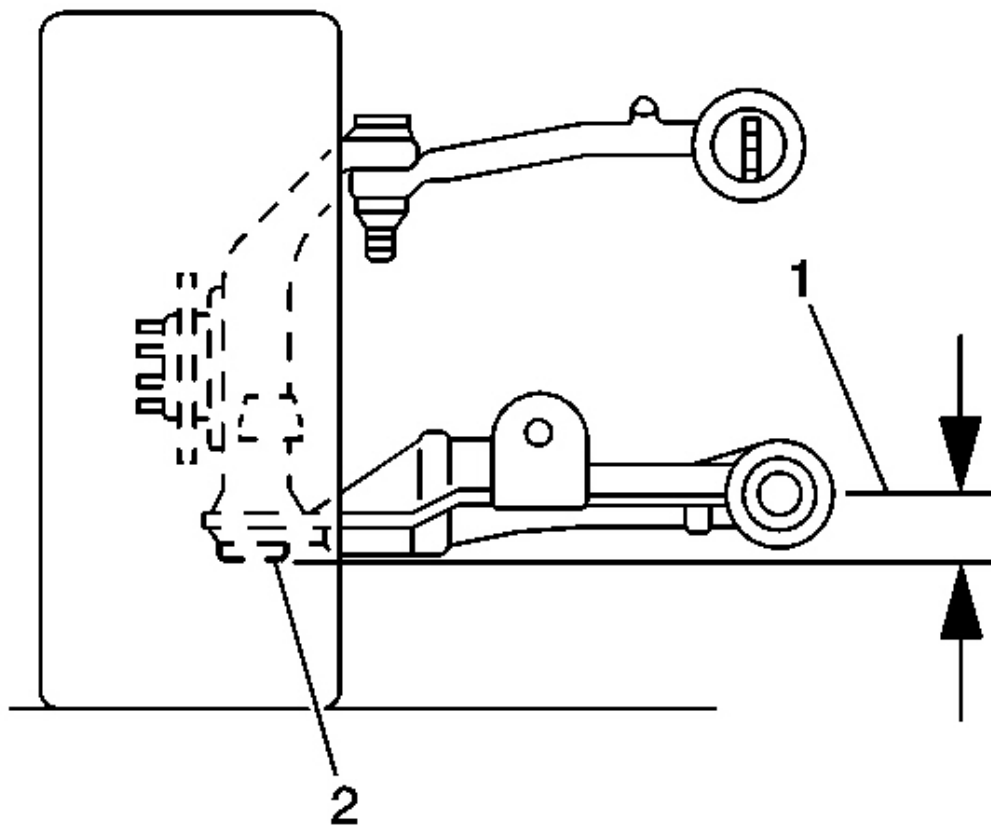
Measuring The Distance Between Lowest Point Of Ball Joint & Center Of Front Side Lower Control Arm Mounting Bolt
